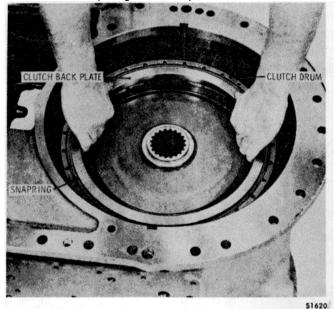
Removing Fifth-and-Sixth-Gear Clutch and Drum Assembly
